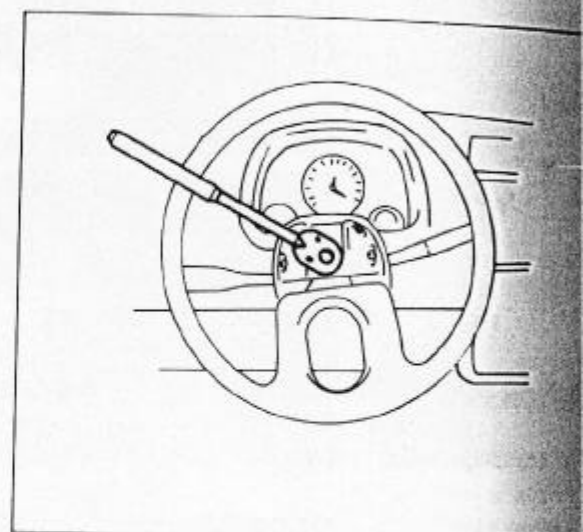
C — 8 TIGHTENING STEERING SHAFT NUT
